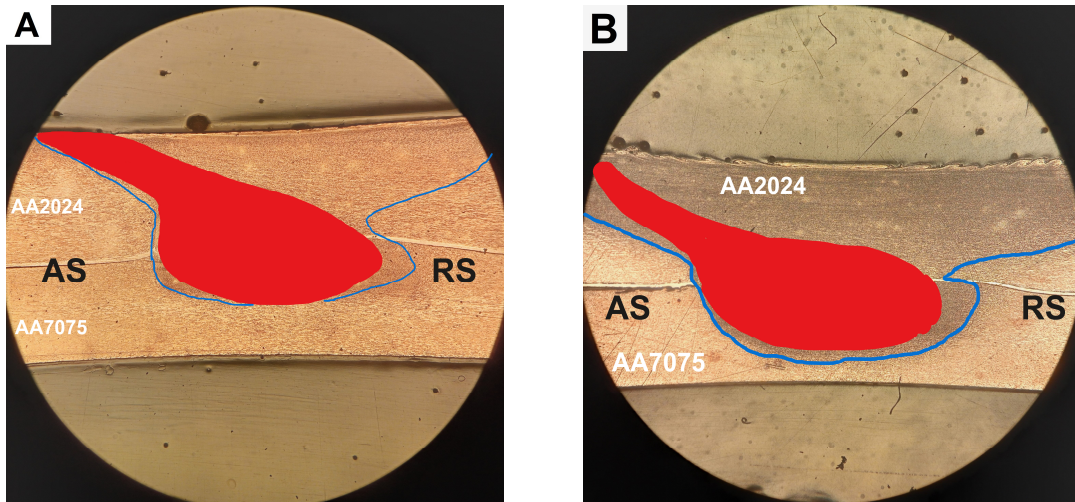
The onion morphology of the welds: A (30 mm/min), B (6mm/min)
